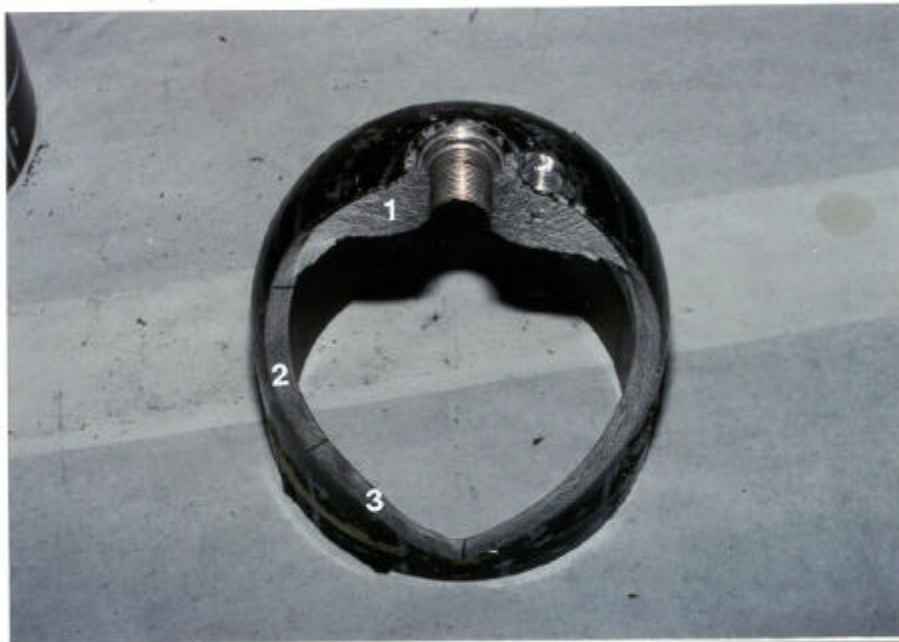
B: View of the fractured dome part cut from the cylinder. It shows locations of fracture surface sections 1, 2 and 3, which were removed for examination.
